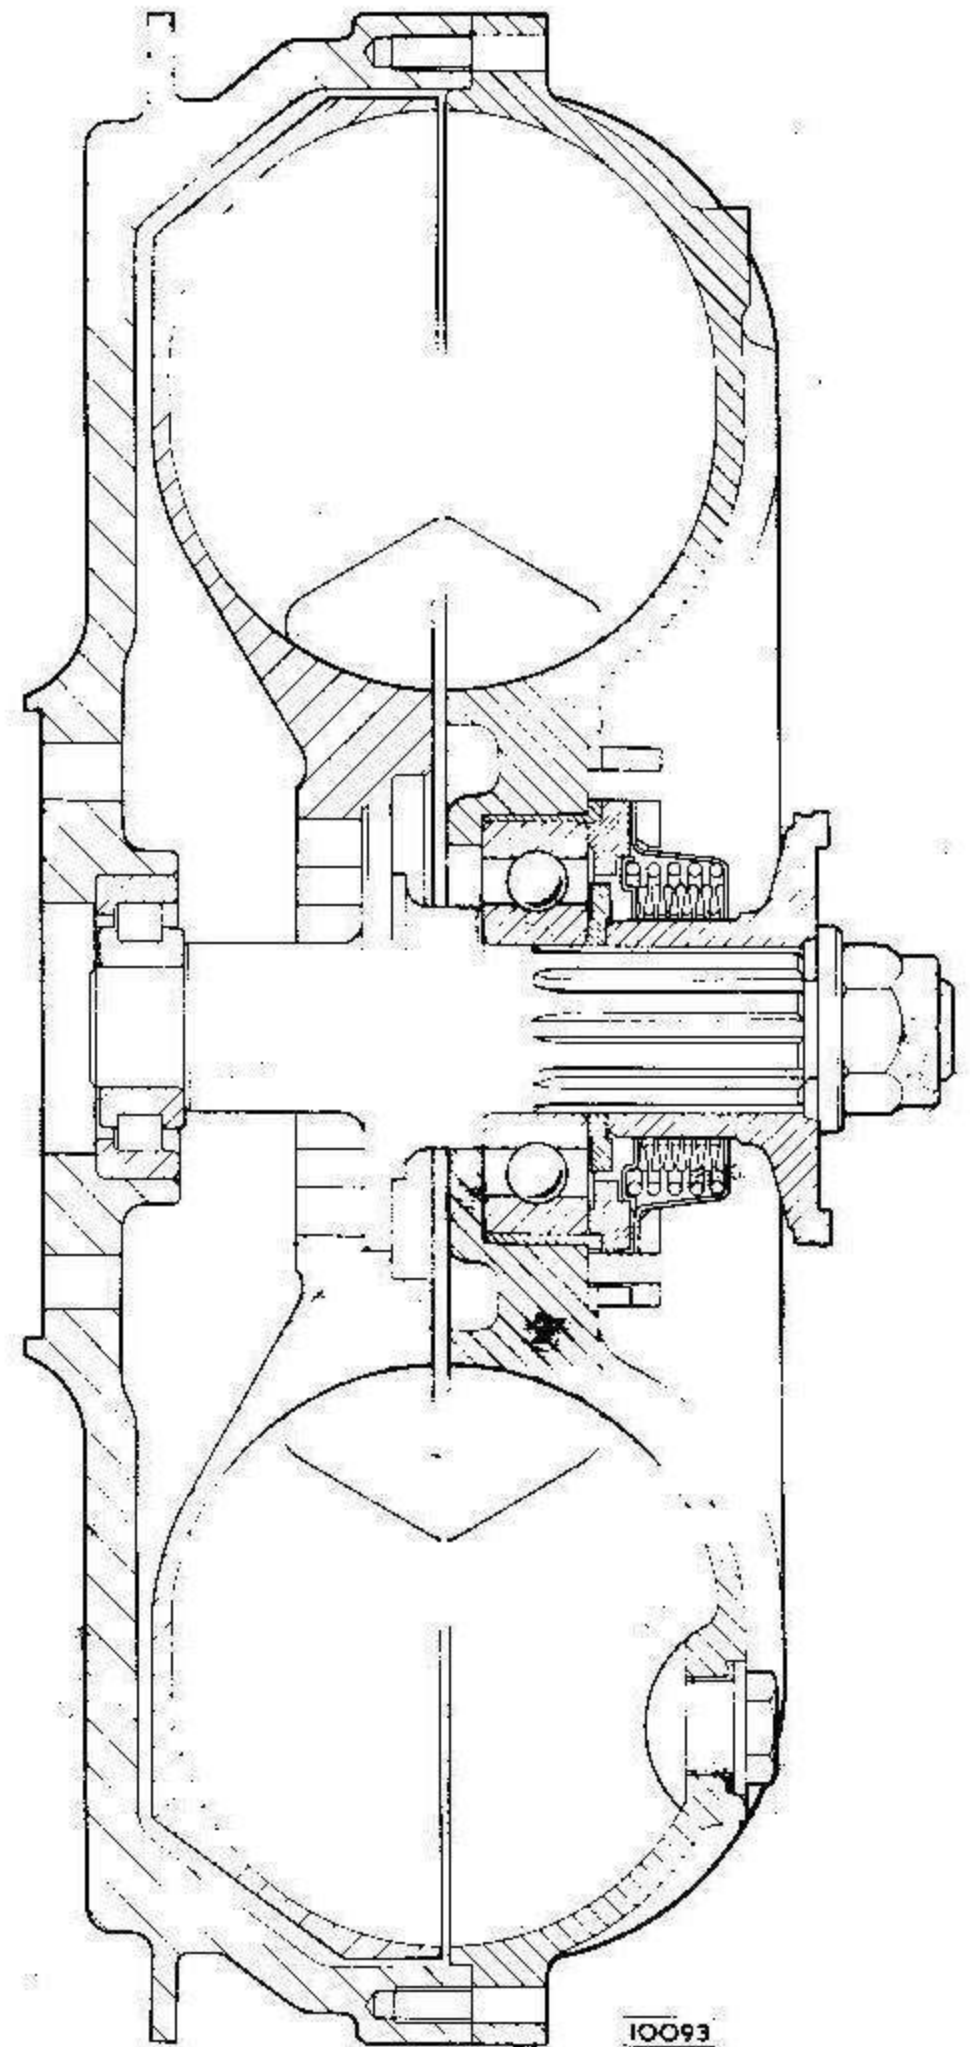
Sectioned view of the fluid flywheel showing the gland seal
